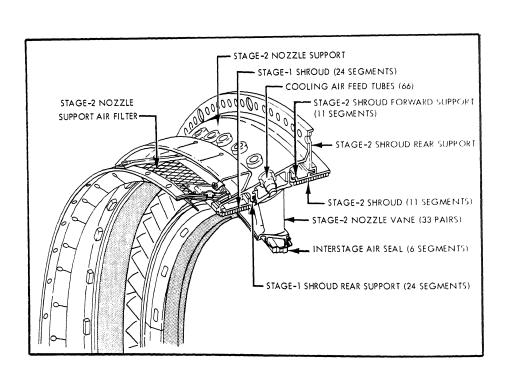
Second-stage high-pressure turbine nozzle.
